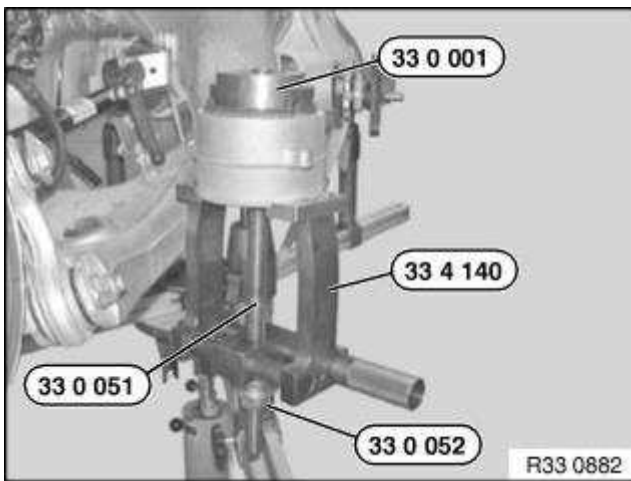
Withdraw Rubber Mount From Rear Axle Support Bush
